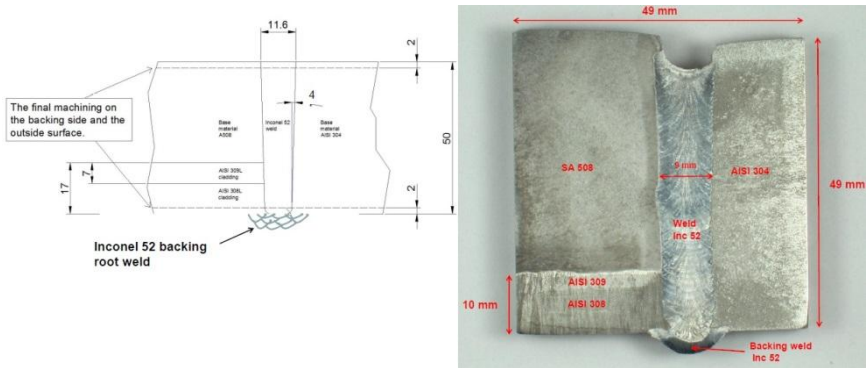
A schematic drawing of weld cross-section of test block Aalto NGW mock-up (Alloy 52) on the left, a photograph taken from the actual polished and etched cross-section on the right.
